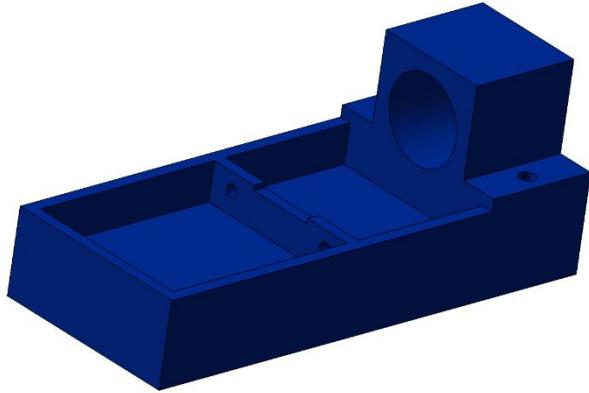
SolidWorks model of the motor-side drive roller mount. A small bay was created to house the NEMA 17 stepper motor used to drive the conveyor belt, with a small wall containing M3-sized through holes for securing the stepper motor to the mount. The stepper motor is mounted at a distance from the ball bearing housing sufficiently sized for installation of the shaft coupler shown in Fig. (16).
